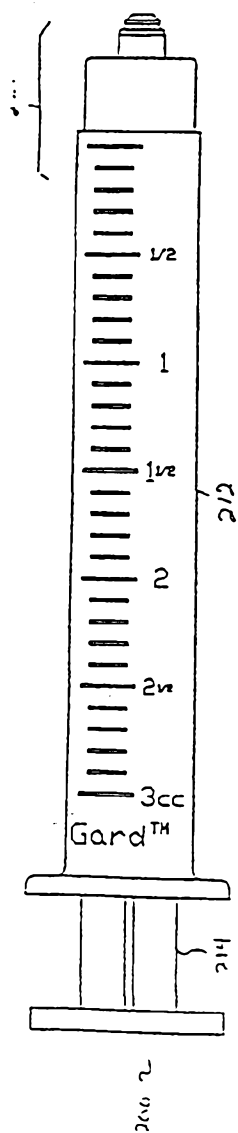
SIDE VIEW - PLUNGER IN LOCKED POSITION
